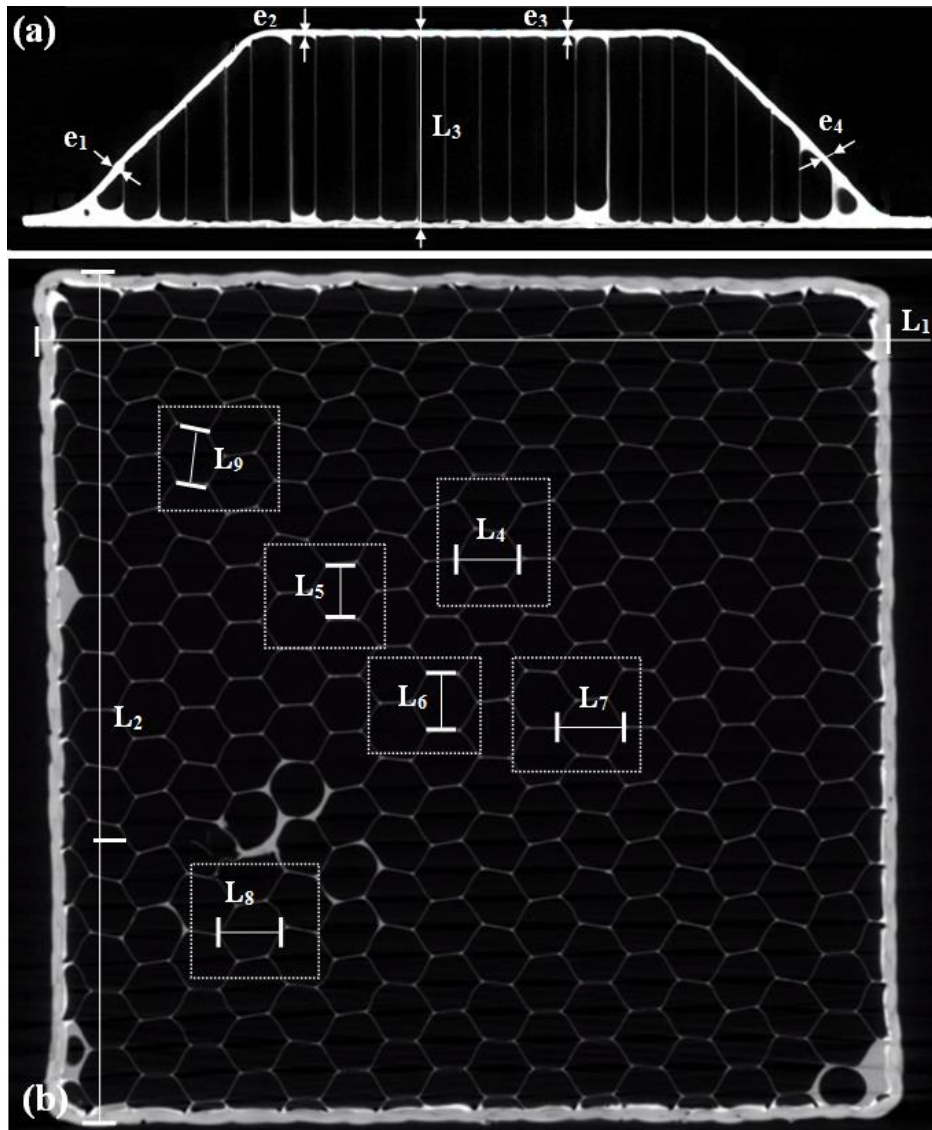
XCT reconstructed cross section for CFRP specimen; (a) XZ plane and (b) XY plane.
